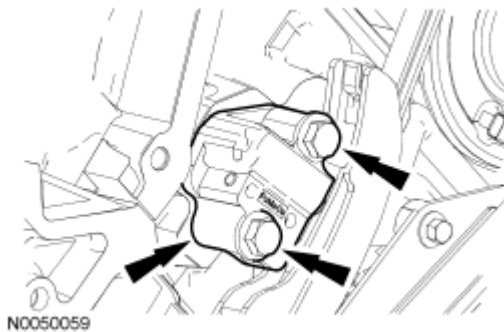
Locating LH Primary Timing Chain Tensioner Bolts
